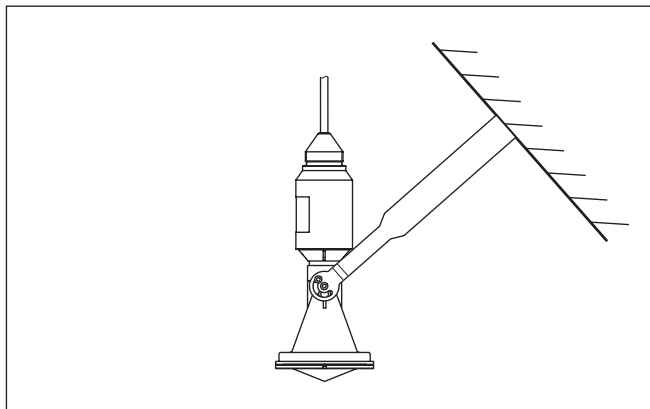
Wall mounting with inclined wall via the mounting strap with length 300 mm
